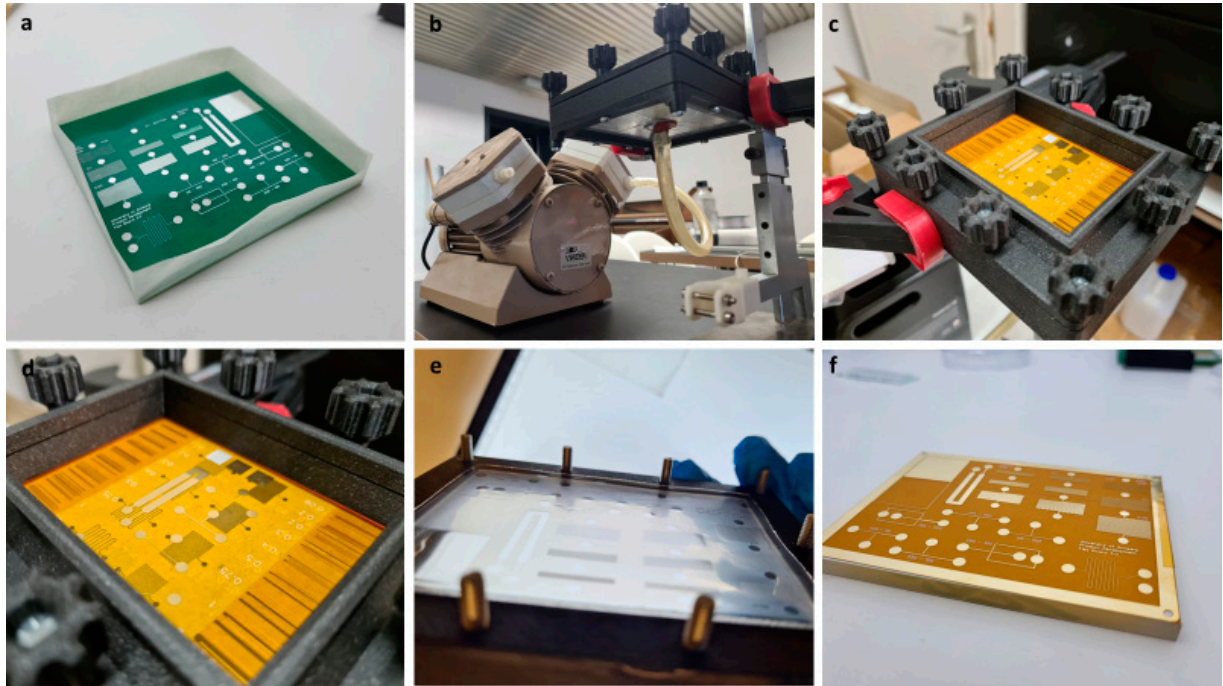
This composite figure consists of six sequential images arranged with corresponding labels (a) to (f): (a) An FR-4 rigid PCB with its borders delineated by painter's tape. (b) A 3D-printed jig securely holds a flexible PCB, connected to a vacuum pump through a flexible PVC tube from the bottom of the setup. (c) An aerial view of the 3D-printed jig, offering a detailed perspective of the apparatus. (d) A close-up of the flexible PCB fixed within the 3D-printed jig, emphasizing the casting surface. (e) Depicts the PDMS casting process, with a photograph post-curing, revealing the final geometric shape of the cast PCB within the mold. (f) The flexible PCB is firmly affixed to an acrylic sheet, ensuring a flat and secure orientation during the casting process.
